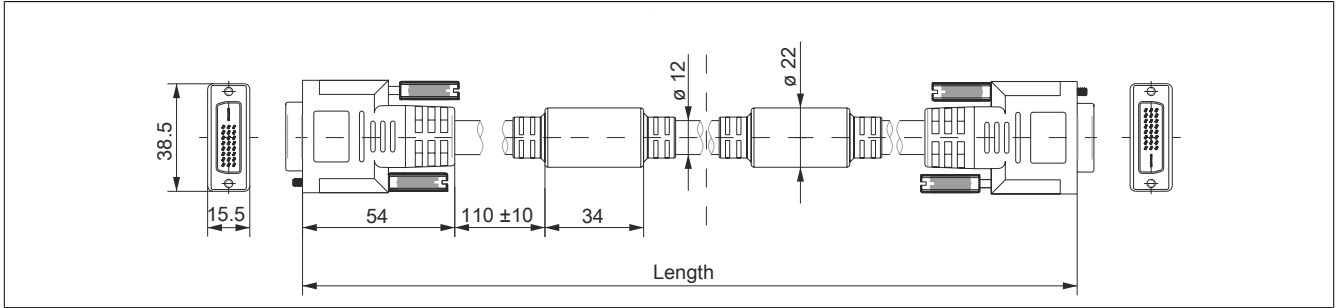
5CASDL.0xxx-03 ≥Rev. E0 - Dimensions
